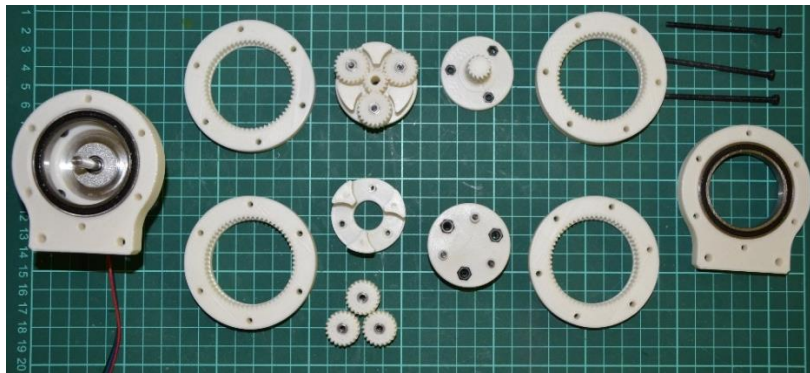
Printed parts of the gearbox assembled with bearings and nuts
